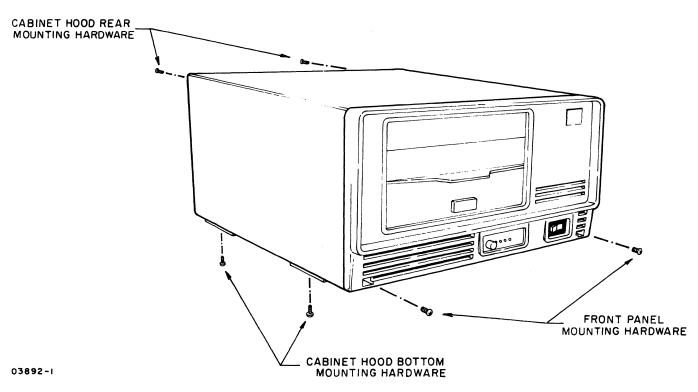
B-3. Front Panel and Cabinet Hood Mounting Details
